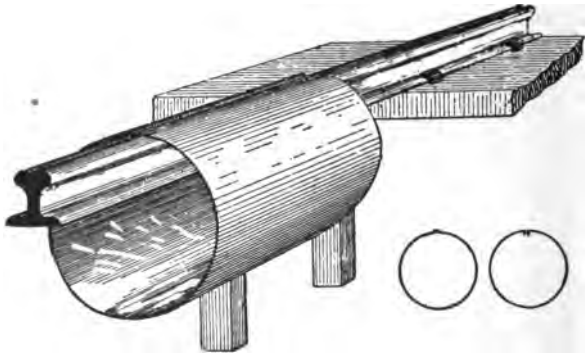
Method of using supporting rail in welding longitudinal seam in a cylindrical section of thin sheets. Also diagrams showing two methods of flanging the sheets for welding.
